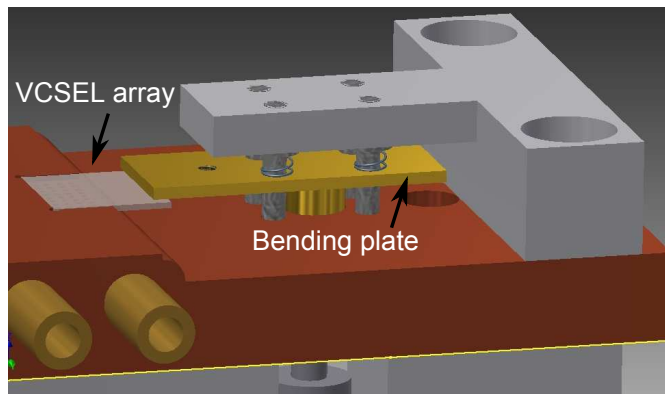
Drawing of a bending device with bending plate and VCSEL array sample (after [5]).
